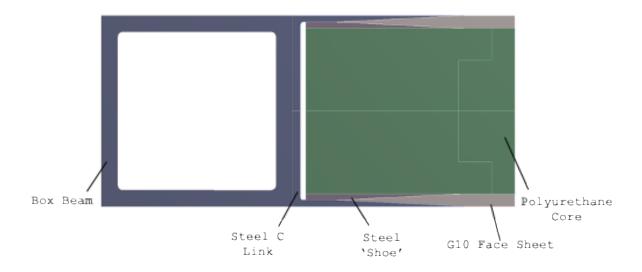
Scarf joint connecting the steel structure to the composite window.
